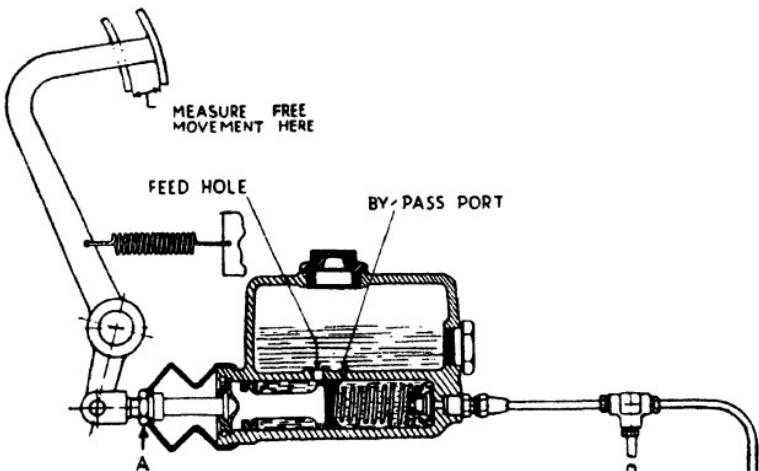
BRAKE-PEDAL ADJUSTMENT
